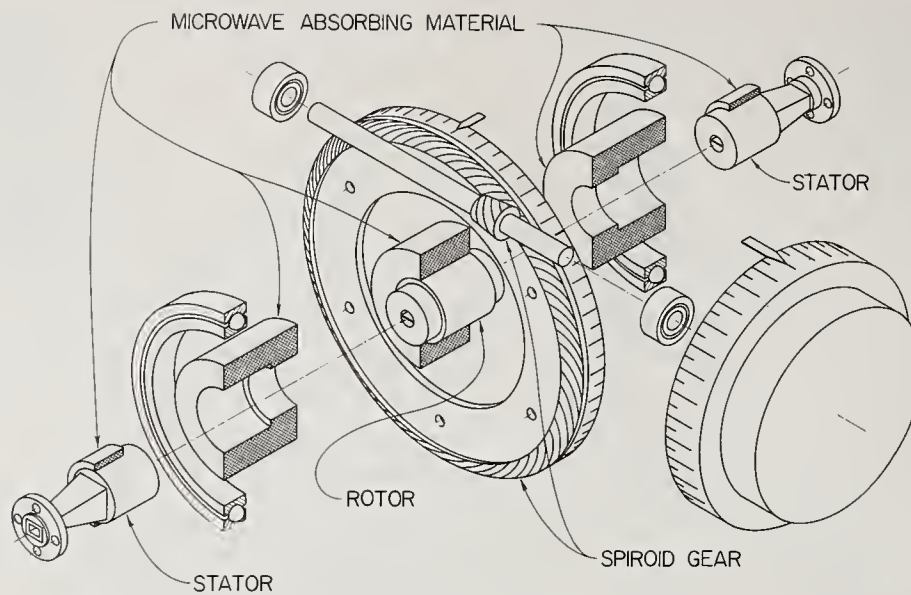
Exploded view of a rotary-vane attenuator utilizing a Spiroid gear set in WR15 waveguide.
